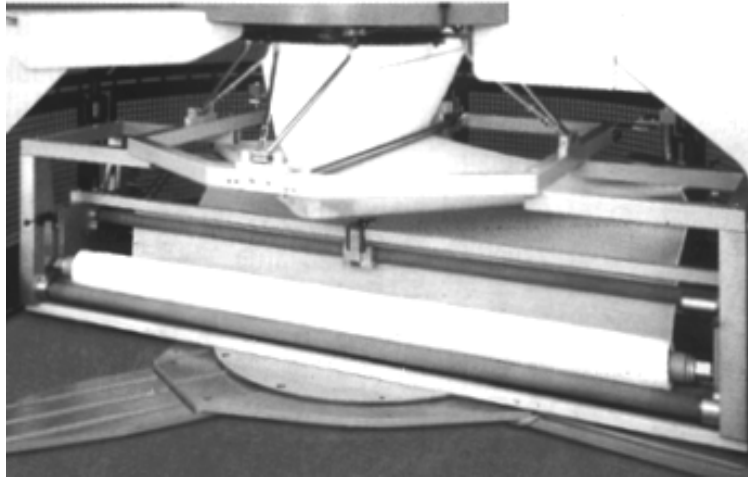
Knitting machine equipped with fabric splitting device and flat sheet wrapping
